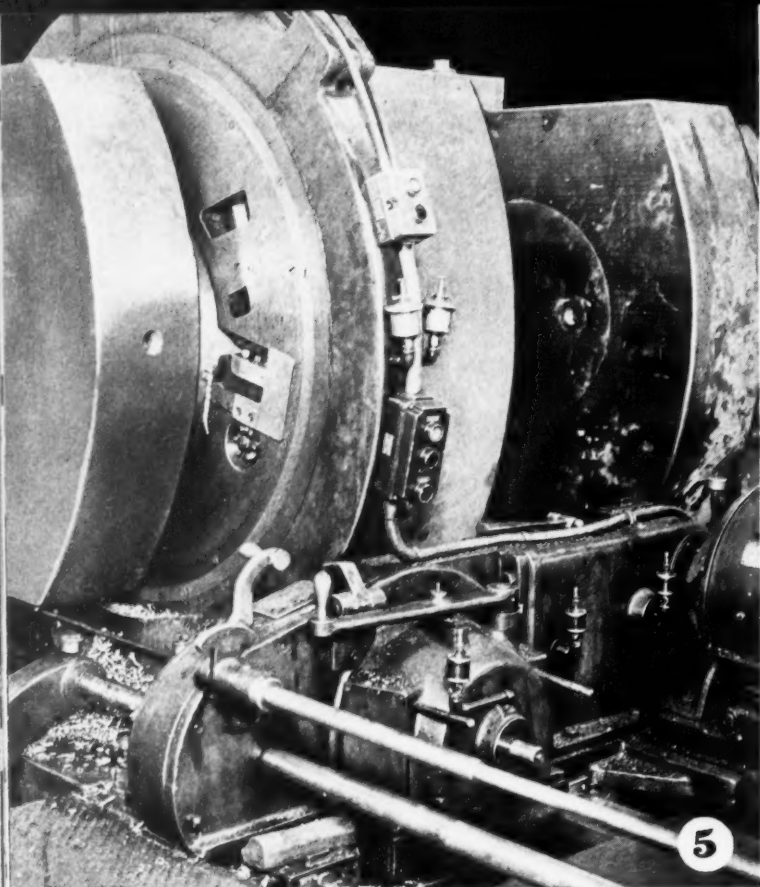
Close-up View of One of the Tool-heads on the Crankpin Finishing Machine, Showing Split Design which Enables One-half of the Tool-head to be Swung upward for Loading and Unloading the Work
